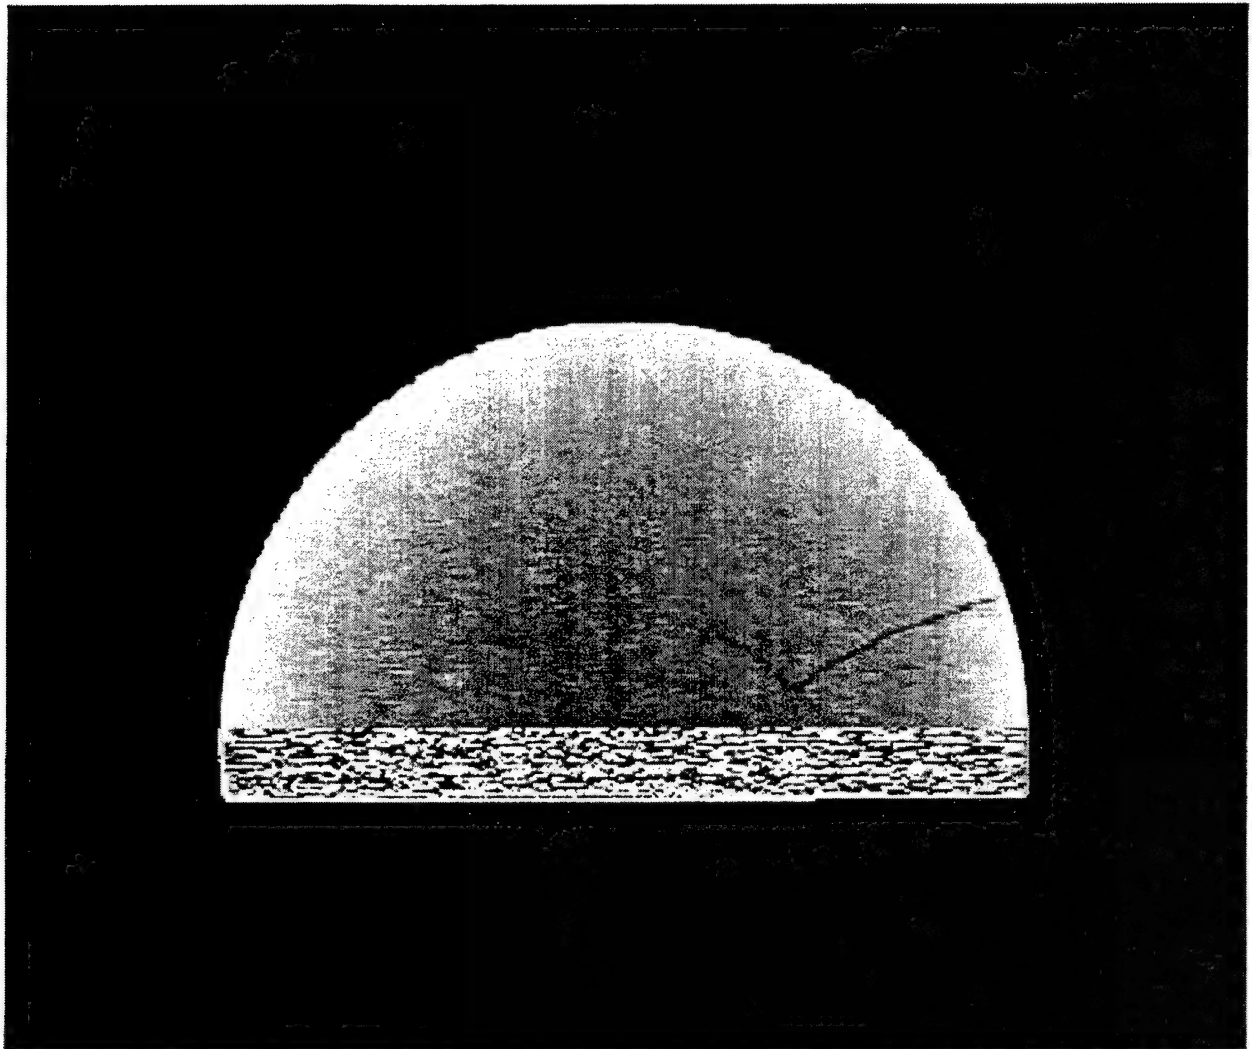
13.83 mm from bottom of disk with 65° rotation about X-axis.
